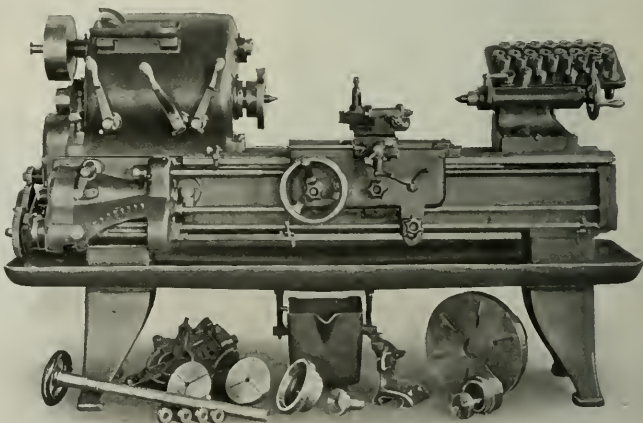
Front View of Pratt & Whitney Single Pulley Gear-driven Lathe.
